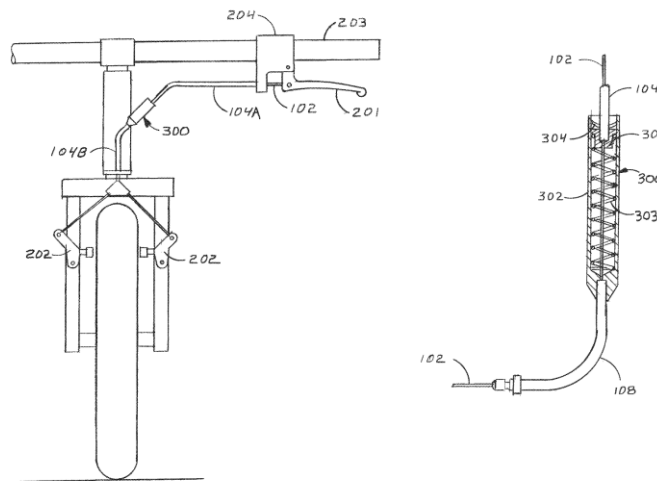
Brake cable length extension safety apparatus. On the left shows a front eye view of a bicycle wheel and how the brakes are connected. On the right shows the extended brake cable length in a housing coupled to a piston at the end of it (G. Ward and W. Hsieh., 2015).
